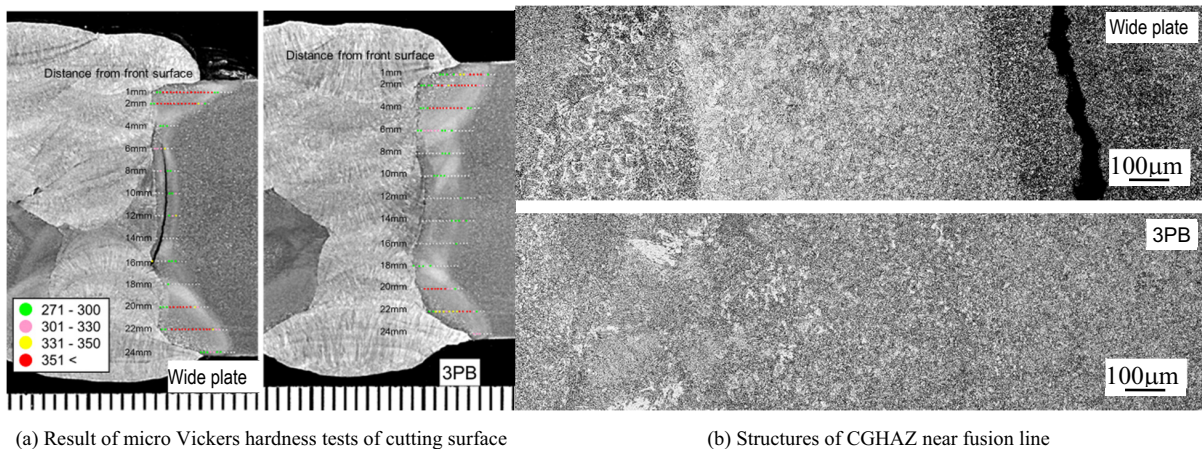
Comparison of weld joints between wide plate tensile test and three-point bend test.
